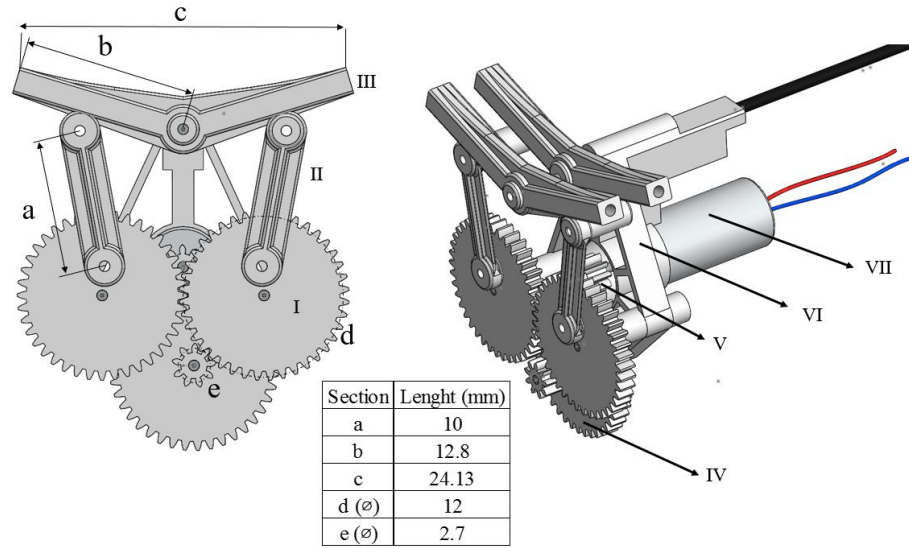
Utilized flapping wing mechanism system with major dimensions
